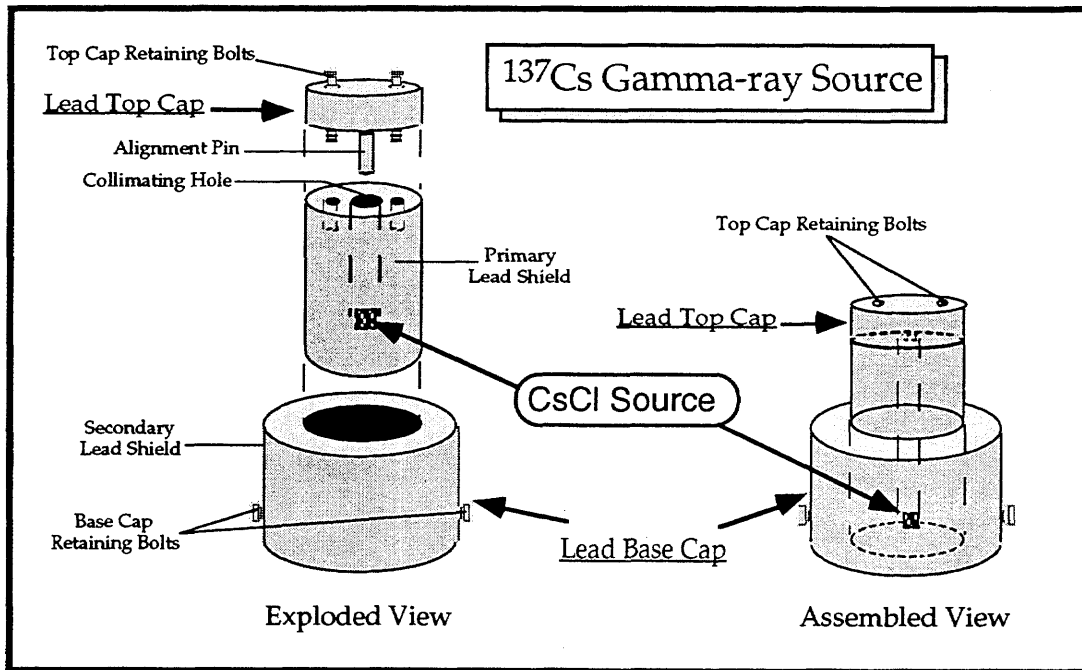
Exploded and assembled views showing the construction and lead shielding of the ^{137}Cs source.
